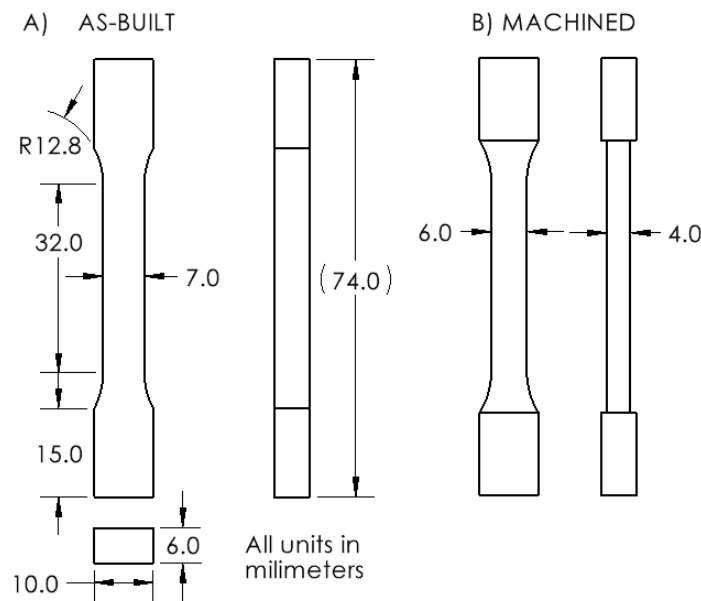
Dimensions of the tensile coupons used in Phase I in the (A) as-built and (B) machined conditions.
